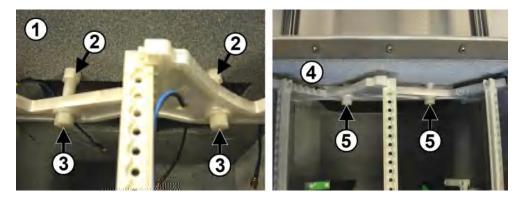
Left: fix two long bolts (3) at the rear wall inside the chamber. Right: fix two short bolts (5) at the front wall
